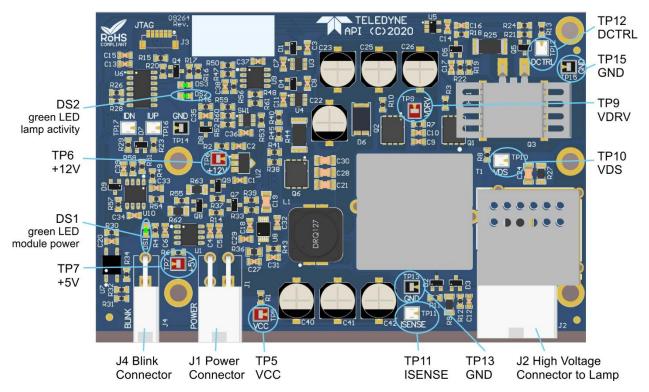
Lamp Driver Board - Test Points and Indicator LEDs
